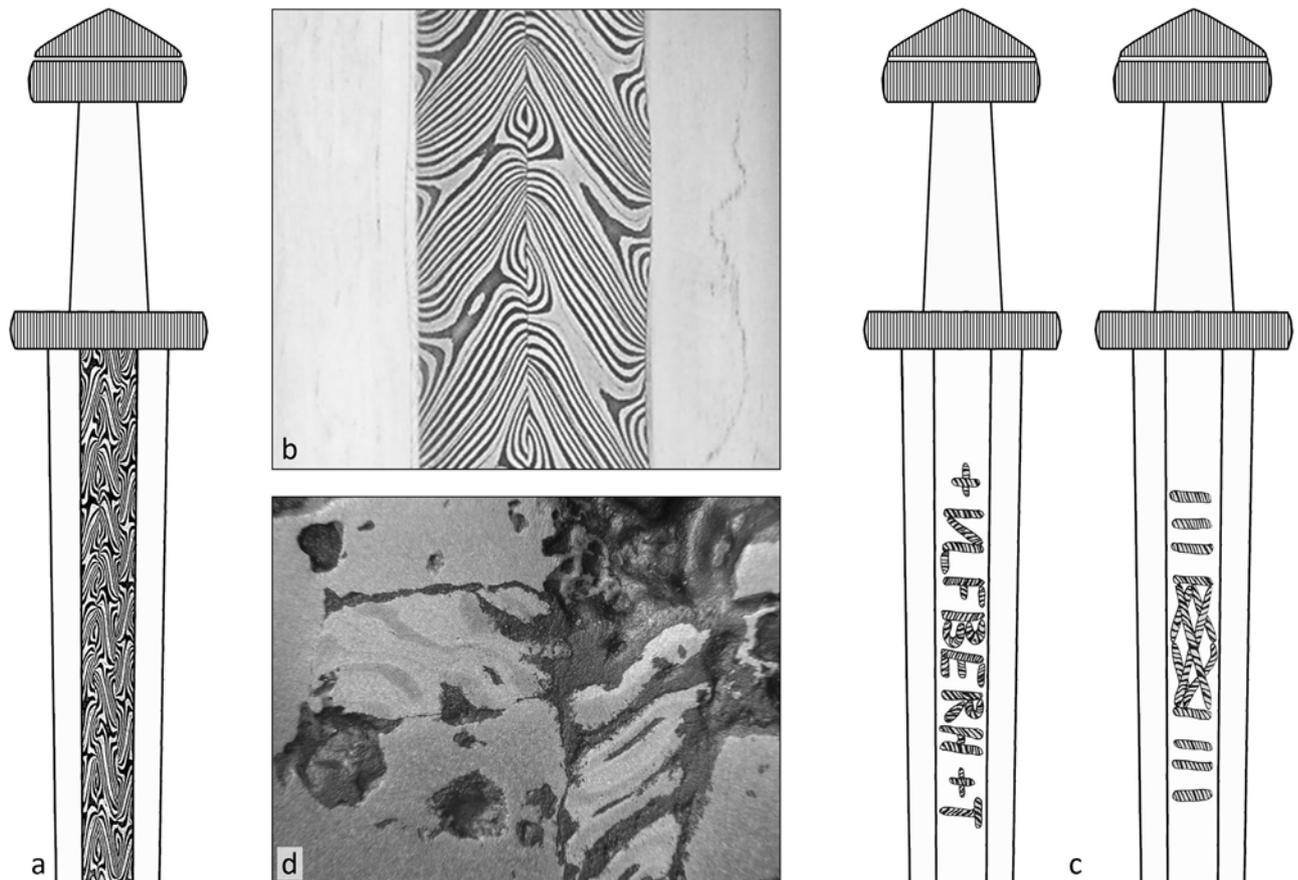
Pattern welding and possibilities of its application to historical sword blades: a – pattern welding in the central part of the blade; b – an example of the real appearance of a pattern welded blade (modern replica made by P. Bárta); c – pattern welding applied in the form of an inlaid inscription and motives; d – an example of the real appearance of an inlaid pattern welded cross found on an archaeologically excavated blade
